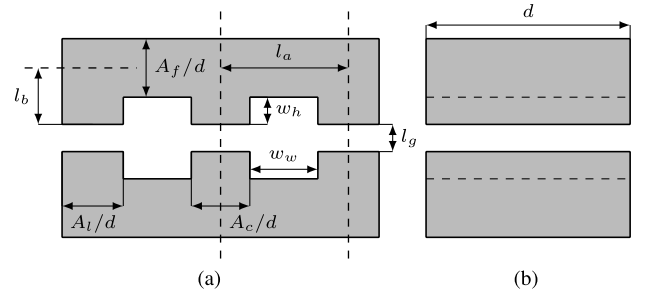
EE core dimensioning. (a) Front view. (b) Side view.
